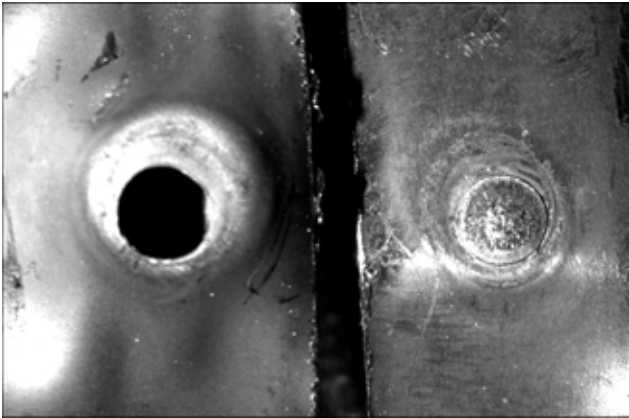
Appearance of weld spot with tearing of its nugget
